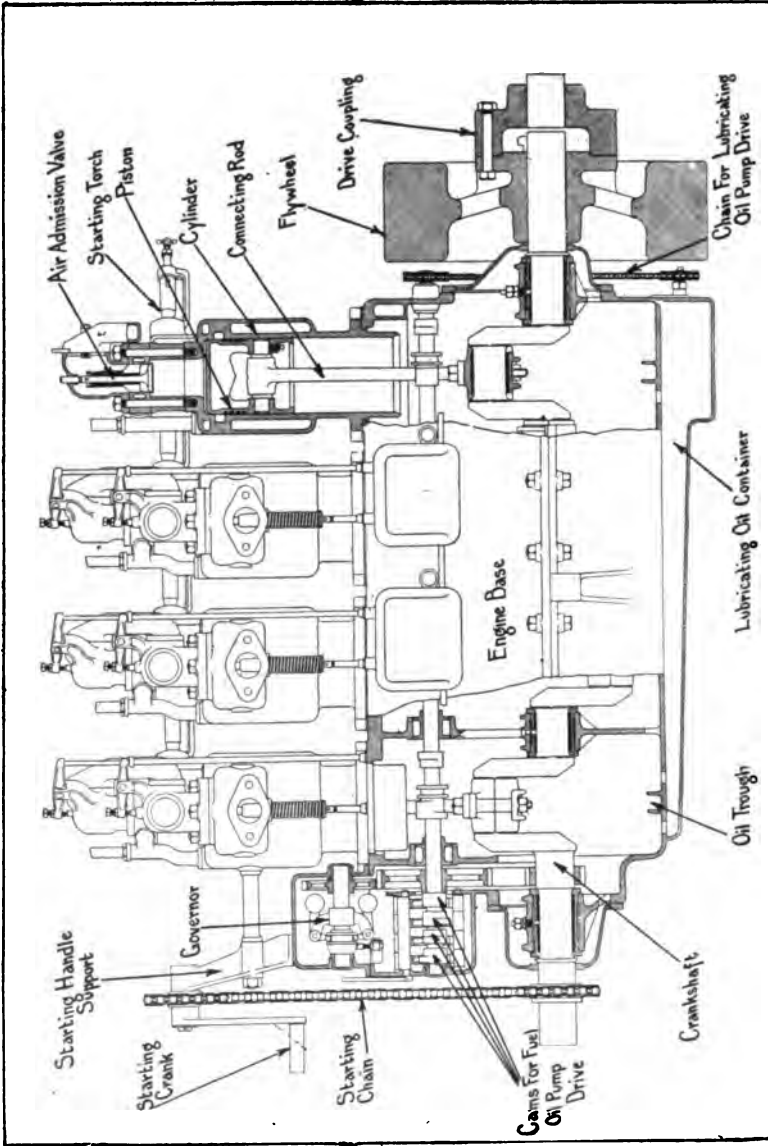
Longitudinal part sectional view of the Cross semi-Diesel, marine engine of the four-cylinder type.
